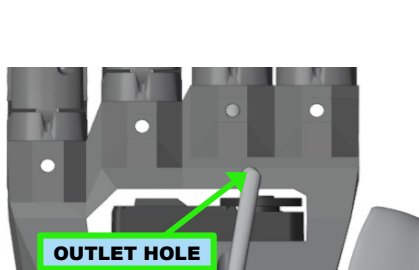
Inserting the tube into the tendon outlet hole (rear view)
